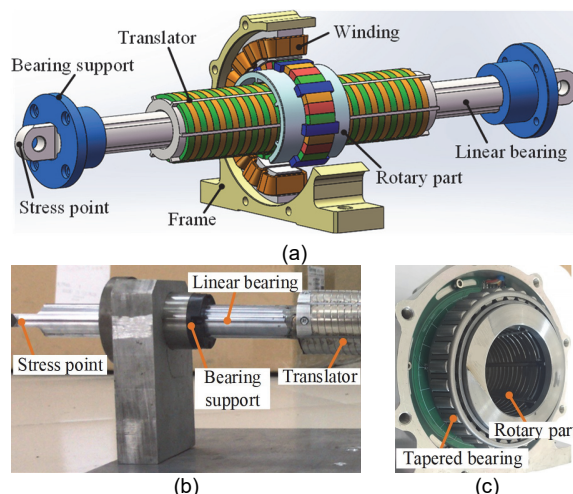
Proposed integrated assembly. (a) Schematic. (b) Internal plug-in linear bearing. (c) Tapered rotary bearing.
